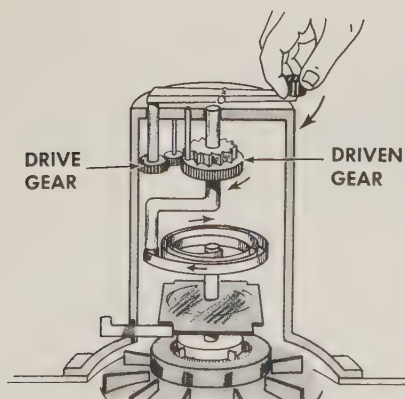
Some windup starters have a gear reduction which makes it easier to turn the crank, although the crank must be turned more times to wind up the recoil spring.
